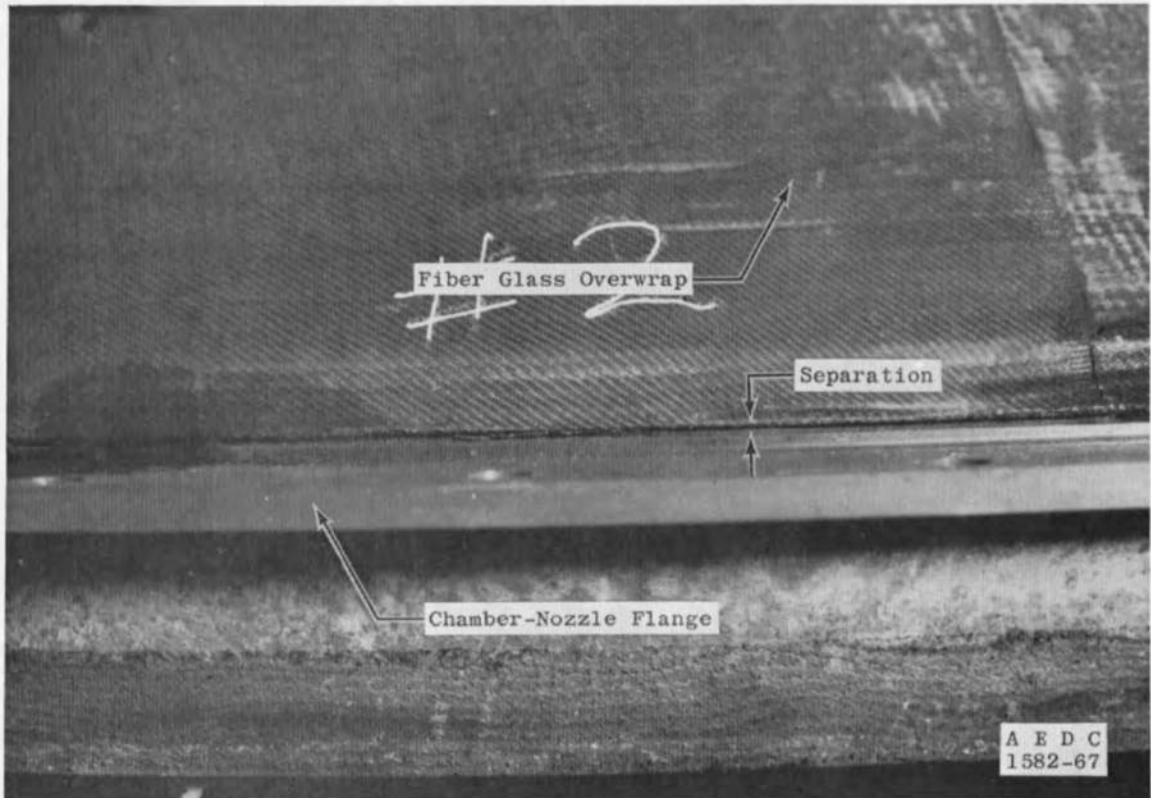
Chamber Flange Separation (Phase V, S/N 324)
